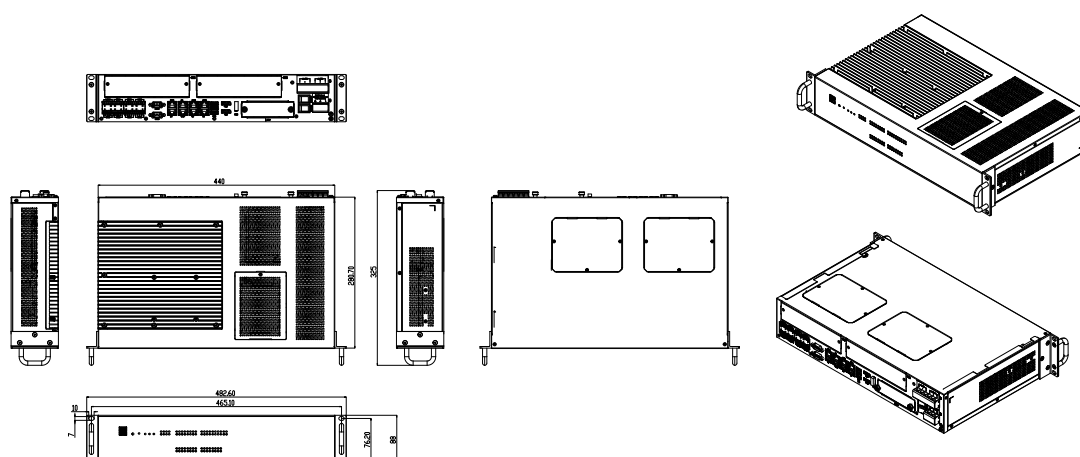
ECU-4784-V2 Chassis Dimensions
